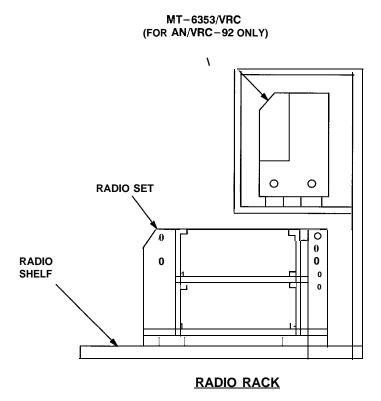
(2). MK and Radio Installation: Radio Equipment Locations
